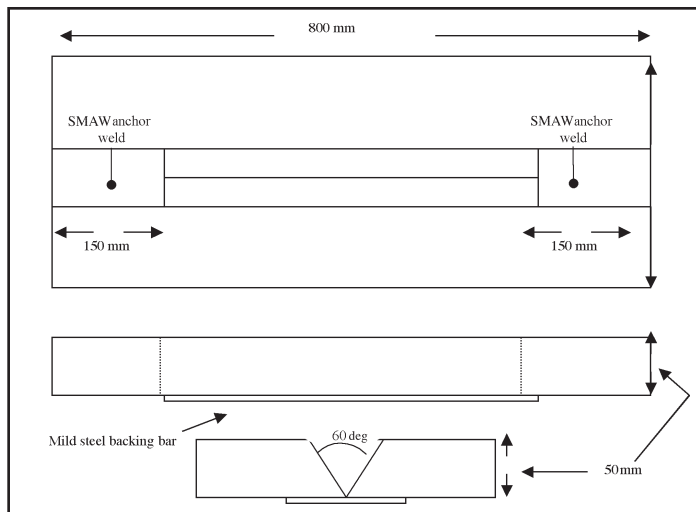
Dimensions of welded butt-joint test panels.
